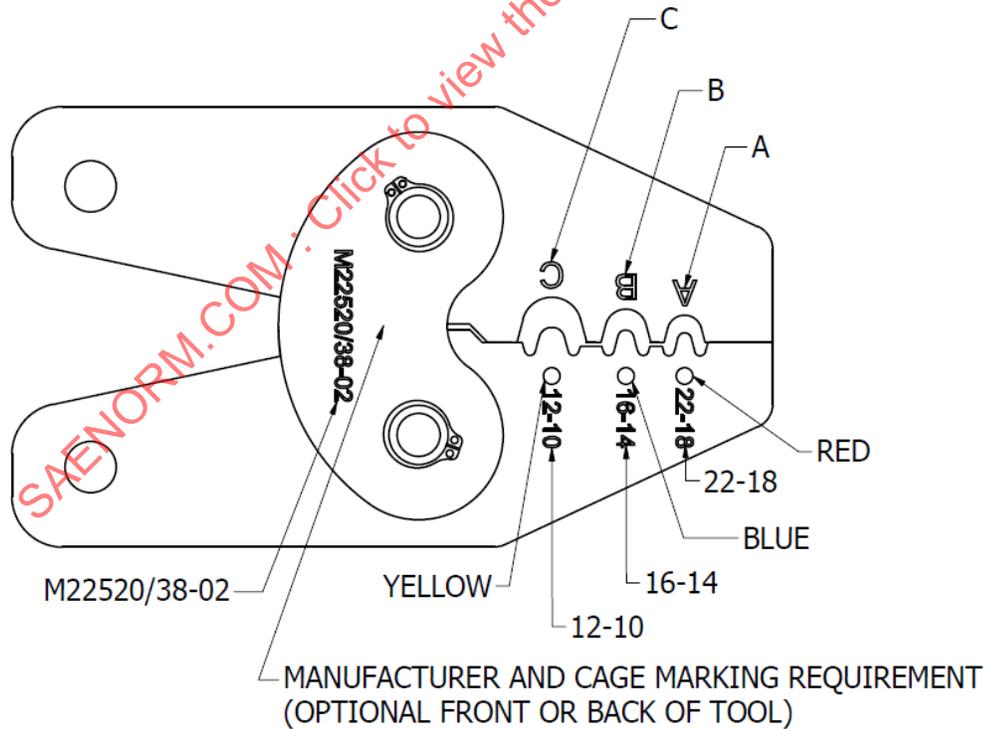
M22520/38-02 TOOL MARKING REQUIREMENTS
